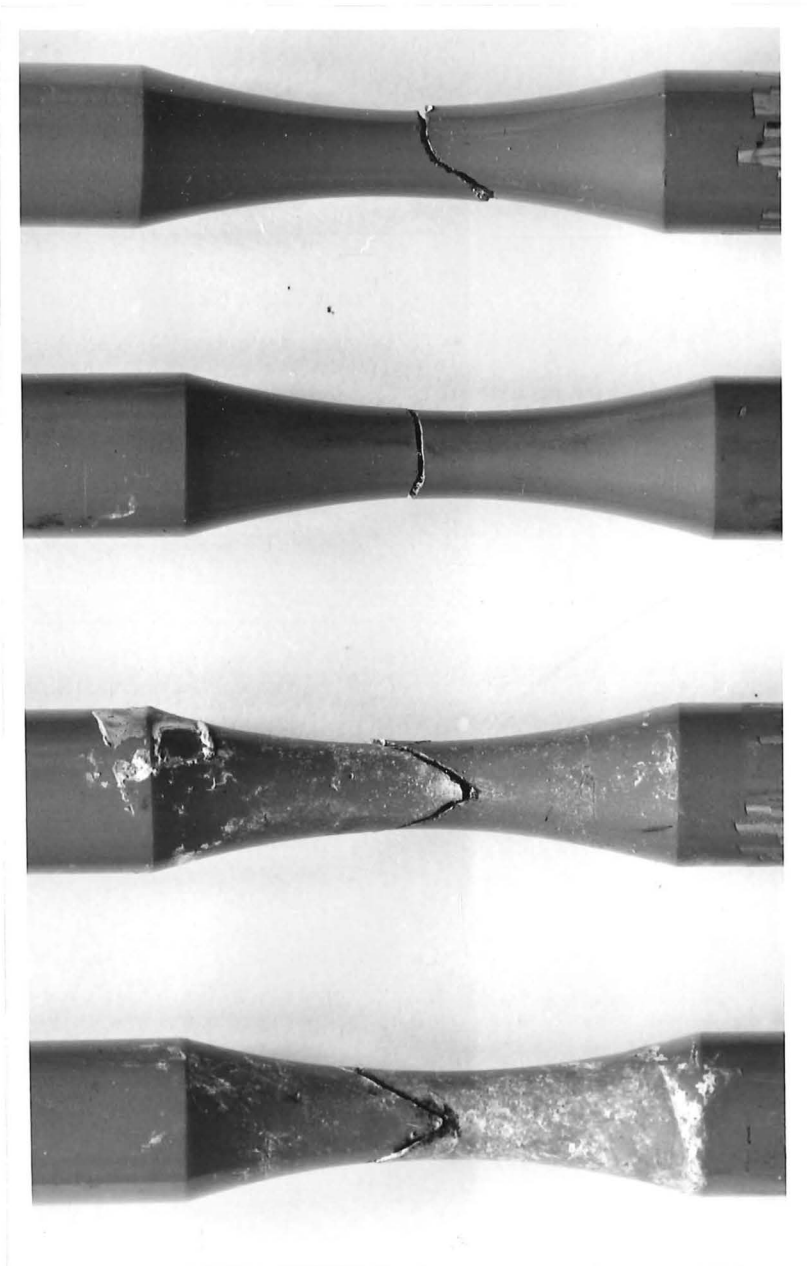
/22: Fatigue fractures in painted rotating beam test specimens. Upper fractures obtained in air, lower fractures in superphosphate corrodent.
